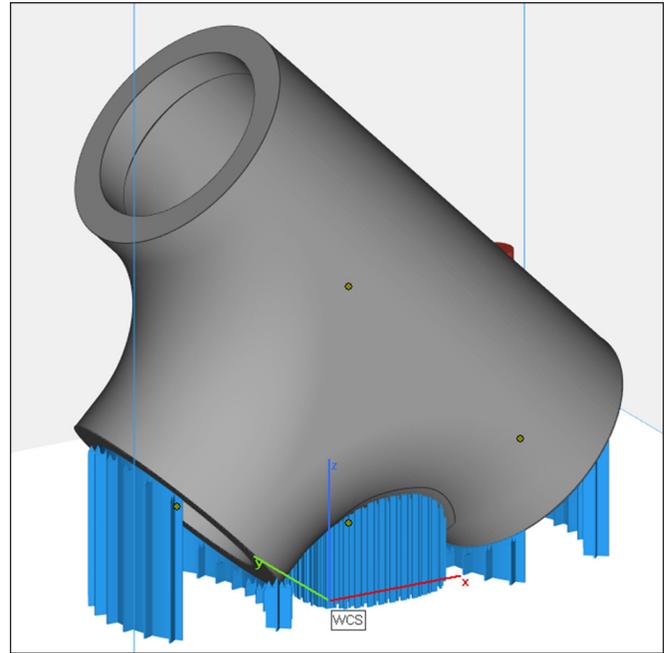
The pipe tee fitting is shown in a supported condition as it will be additively manufactured.
